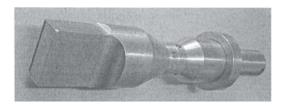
Concentrators used to weld vehicle optical elements
